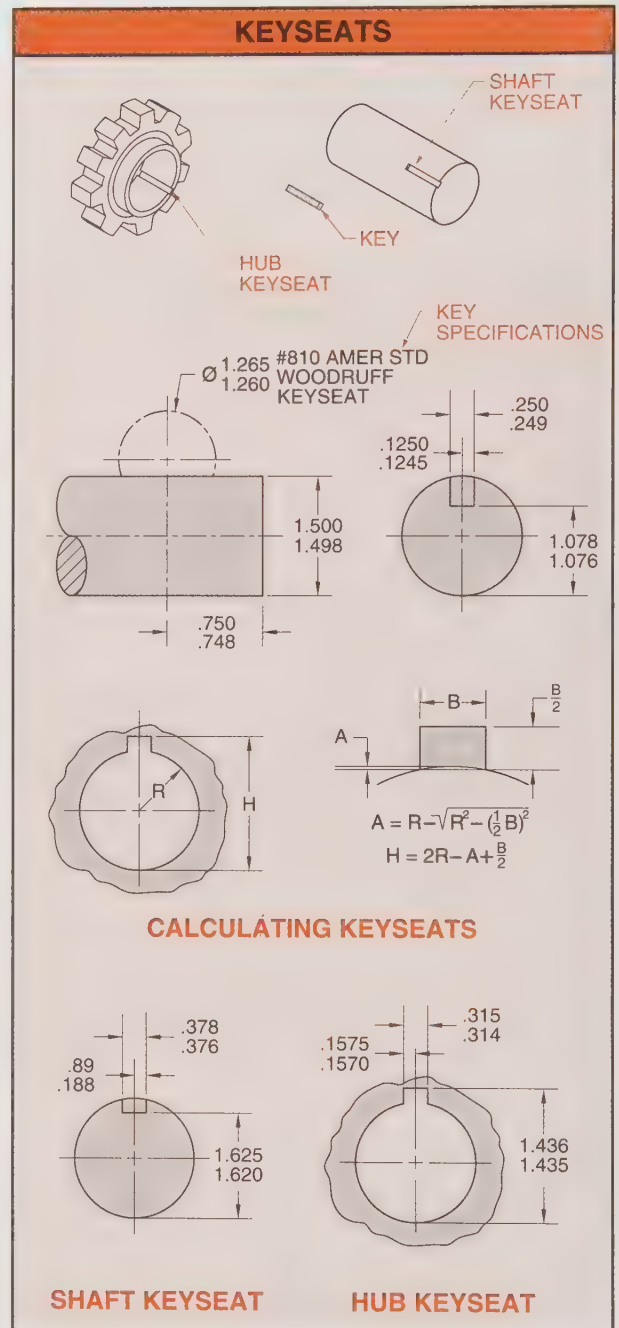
Keyseats are grooves machined into a shaft or hub which match key specifications.
